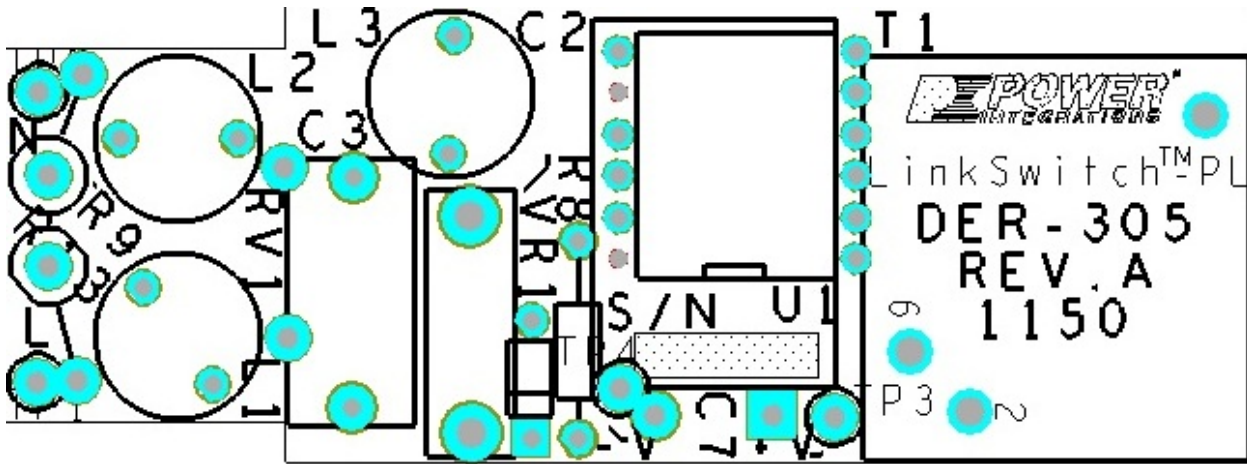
Top Side. Dimension 53.5 mm x 19.6 mm.
